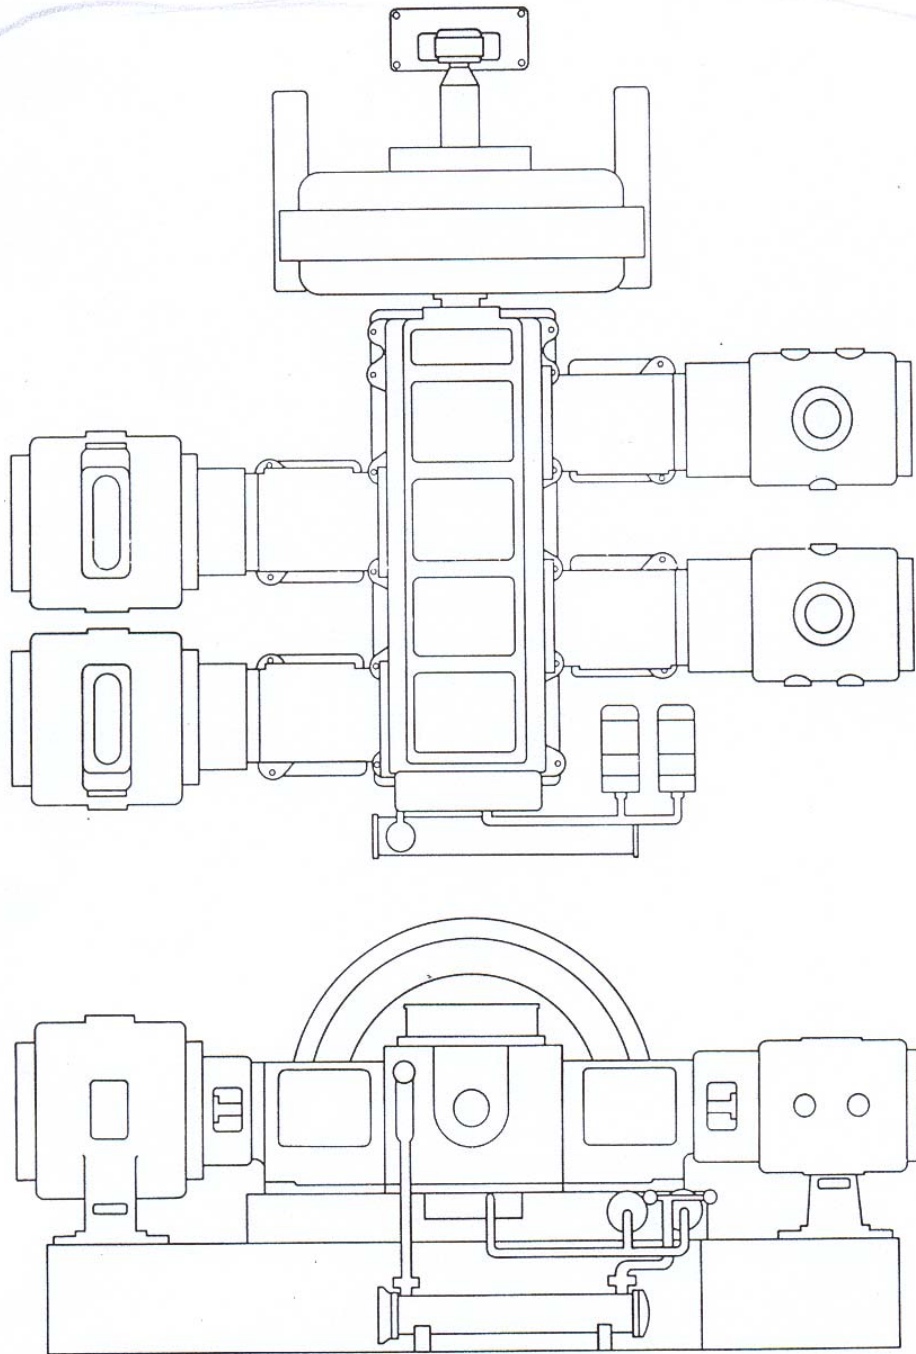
Plan of a four-cylinder, horizontal-opposed, heavy-duty compressor, usually synchronous motor drive, but may be gear-driven from a steam turbine. Built with one to ten crank throws and cylinders. 200 to more than 12,000 HP.
